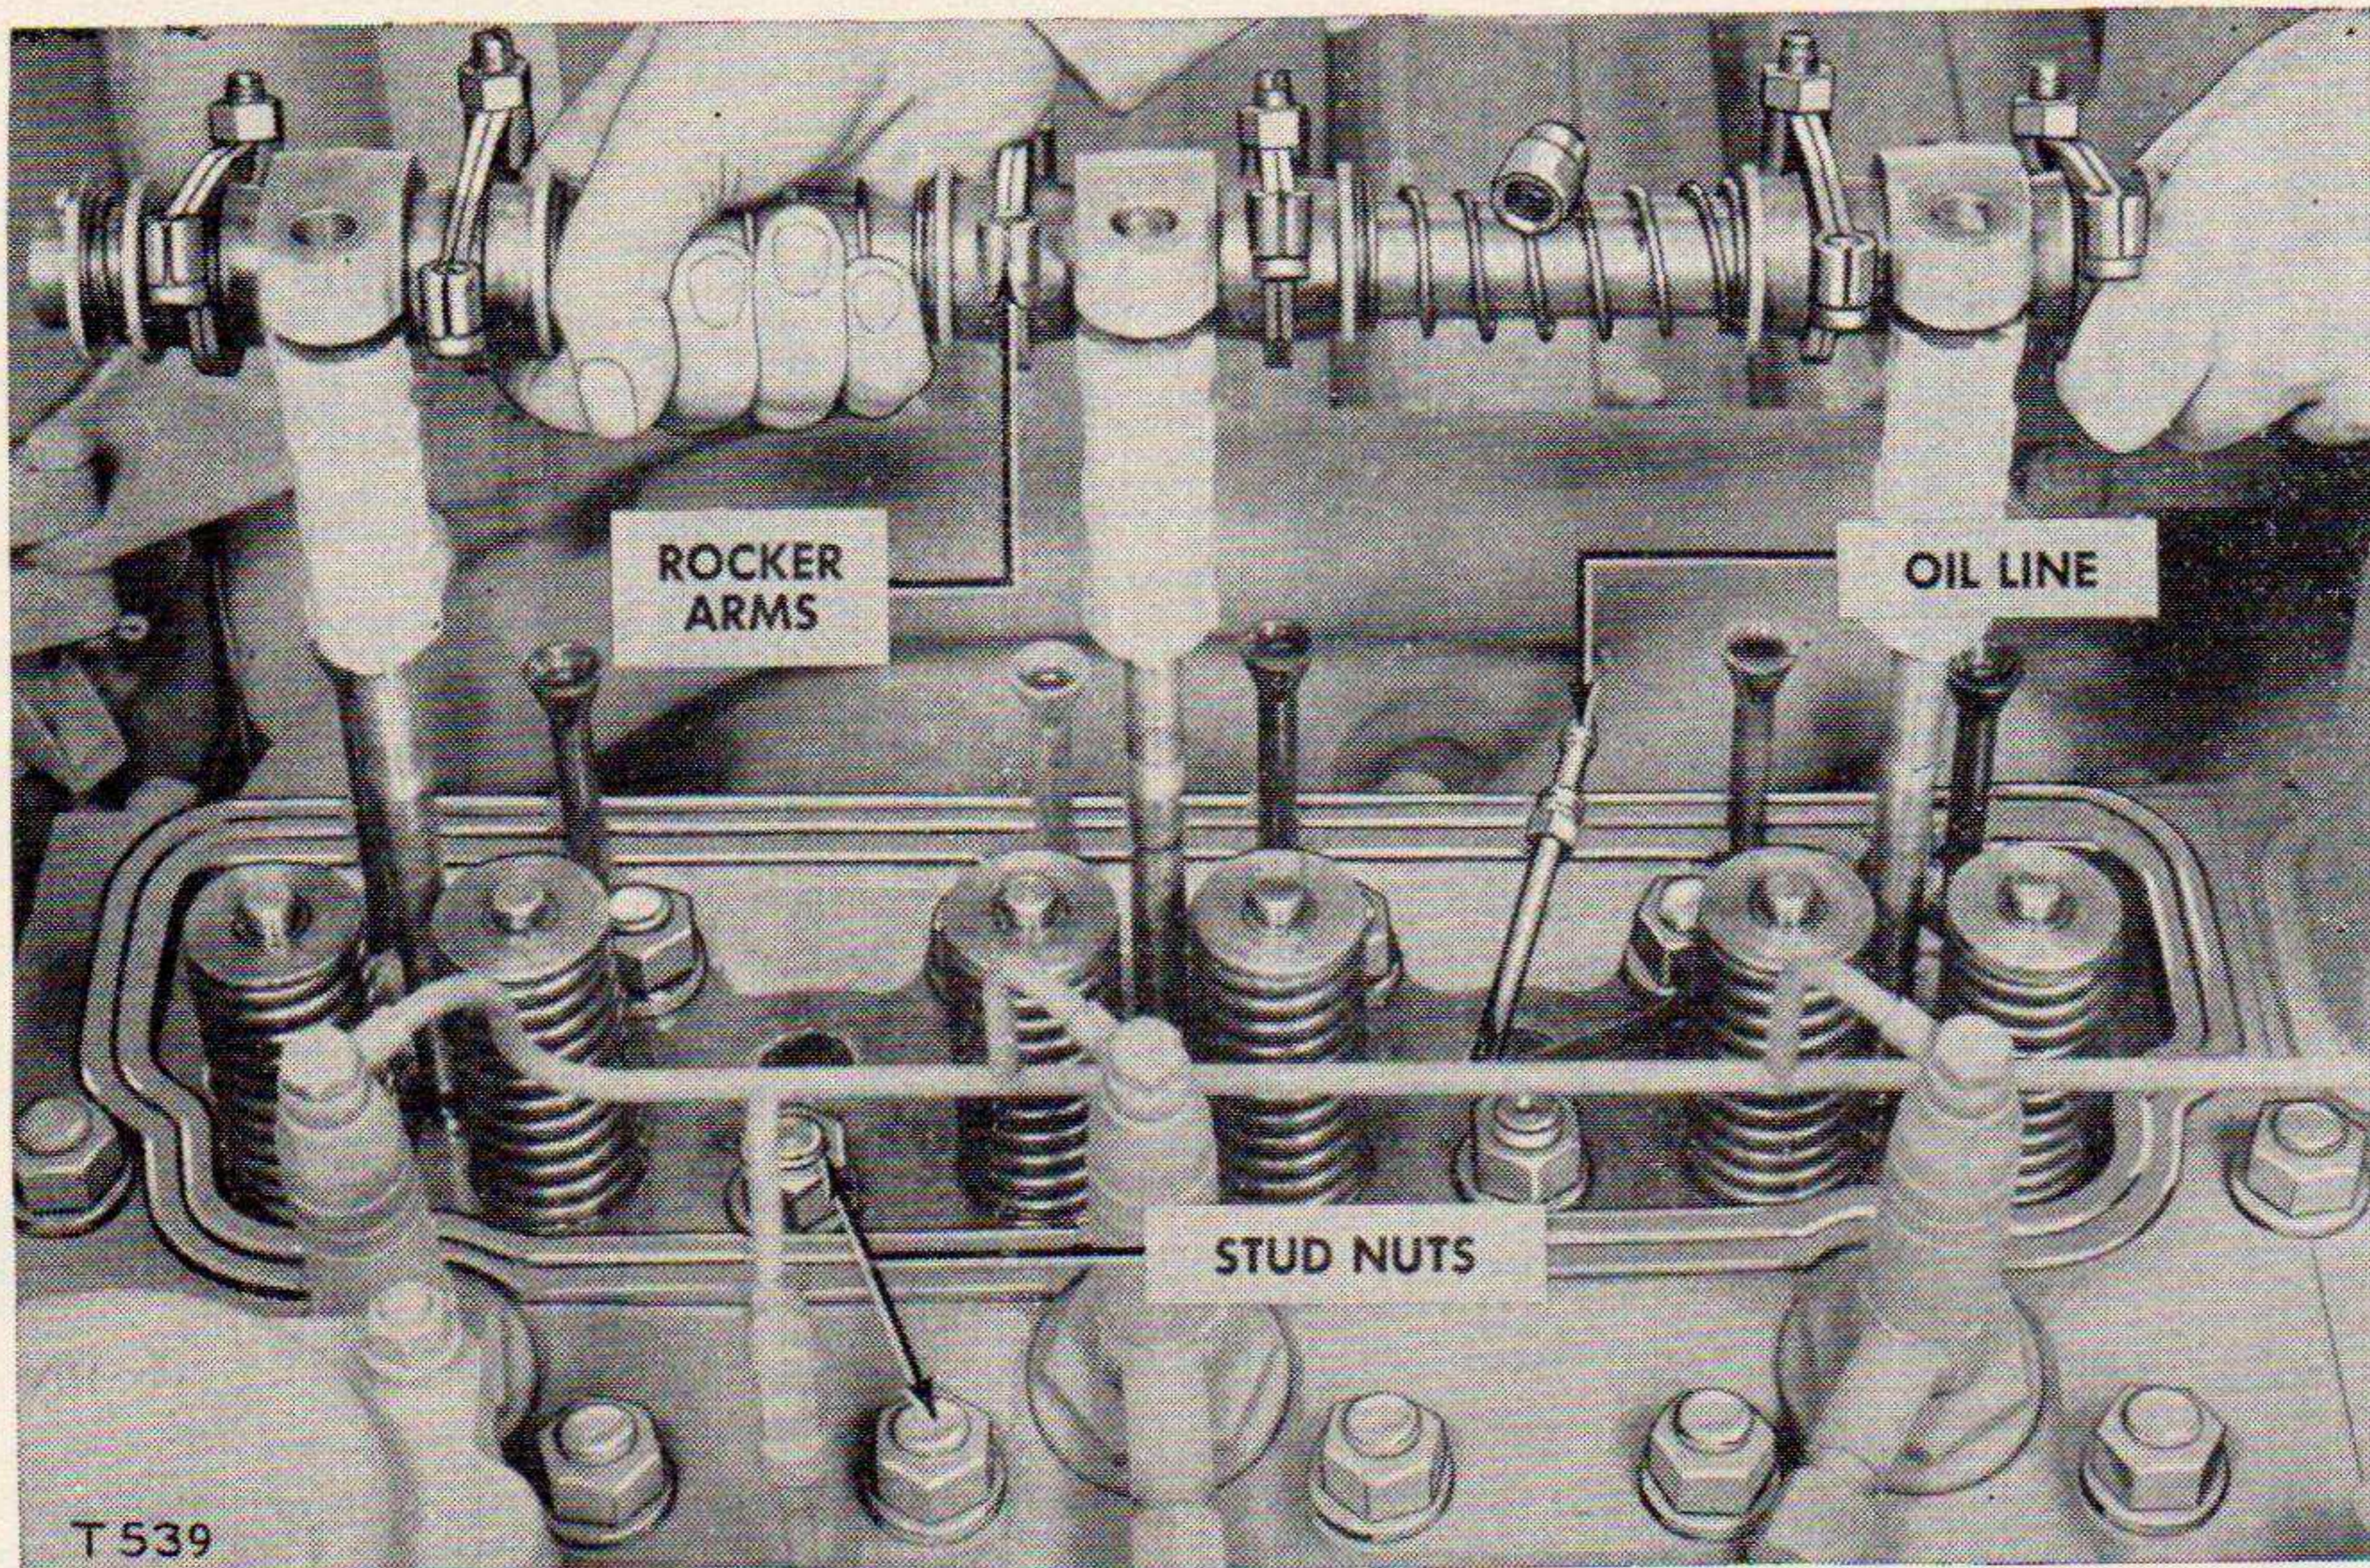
Removing rocker arms preparatory to tightening head stud nuts.
